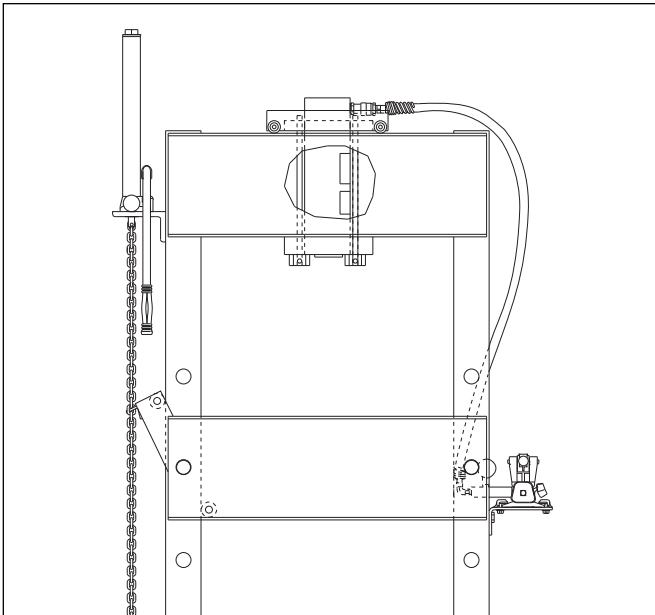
Hydraulic Connections for Single-Acting Cylinders
